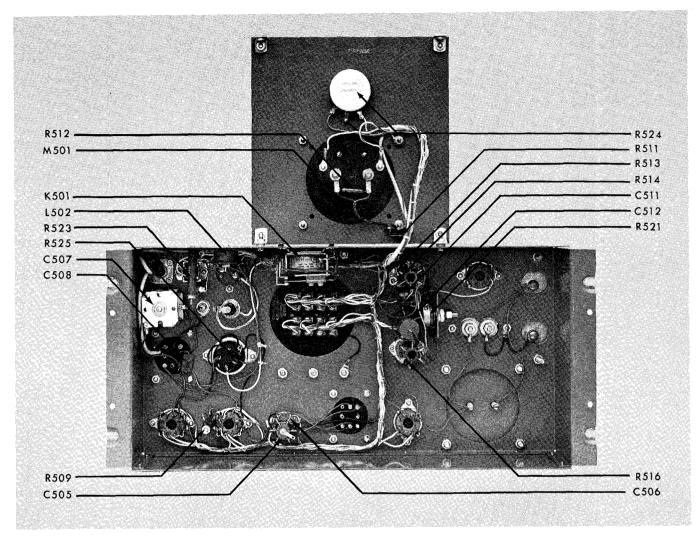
MASTER BIAS OSCILLATOR PARTS LOCATION (INTERIOR VIEW)
